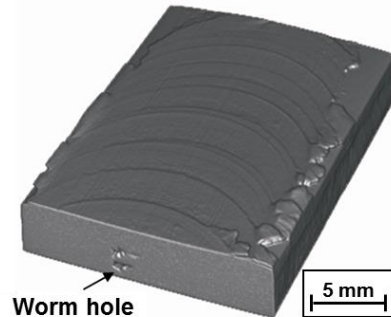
Detection of a worm hole in a friction stir welded Al-joint by 3D-CT.
